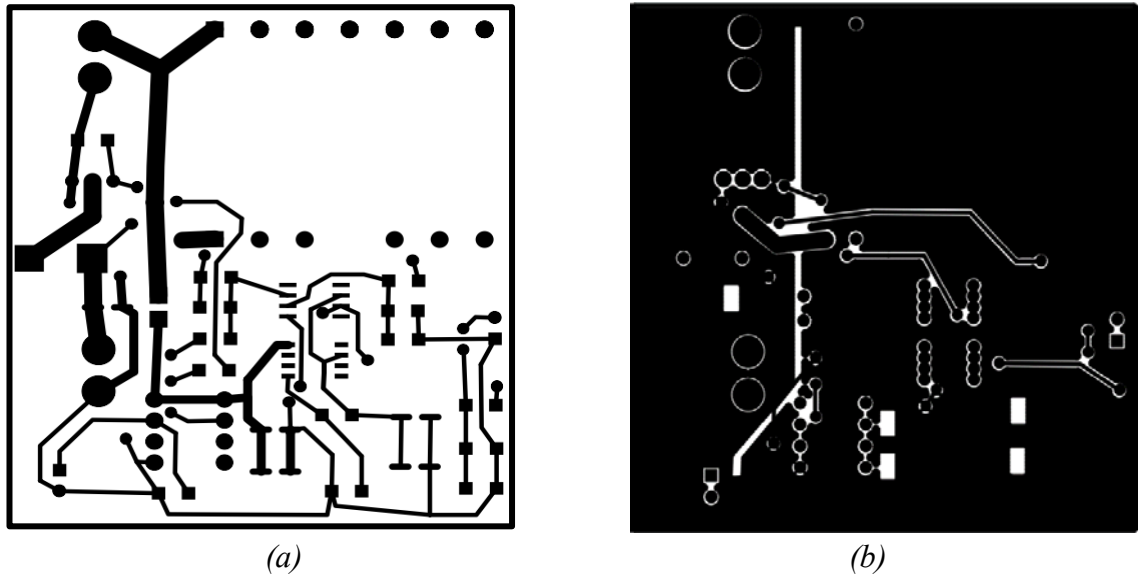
The final PCB layout of the boost converter circuit with copper traces and a) shows the top side and b) side shows the bottom side of the PCB
